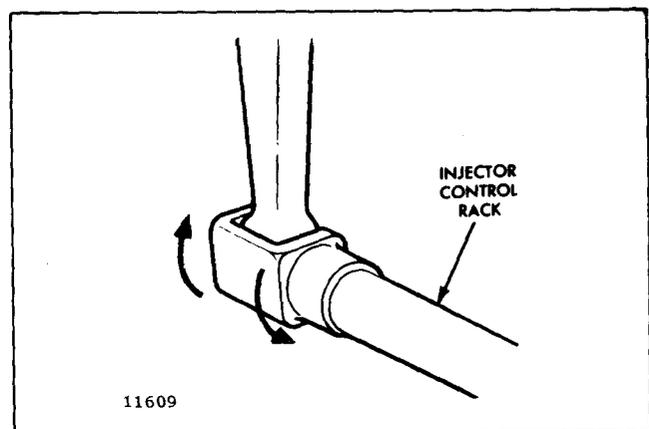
Checking Rotating Movement of Injector Control Rack
